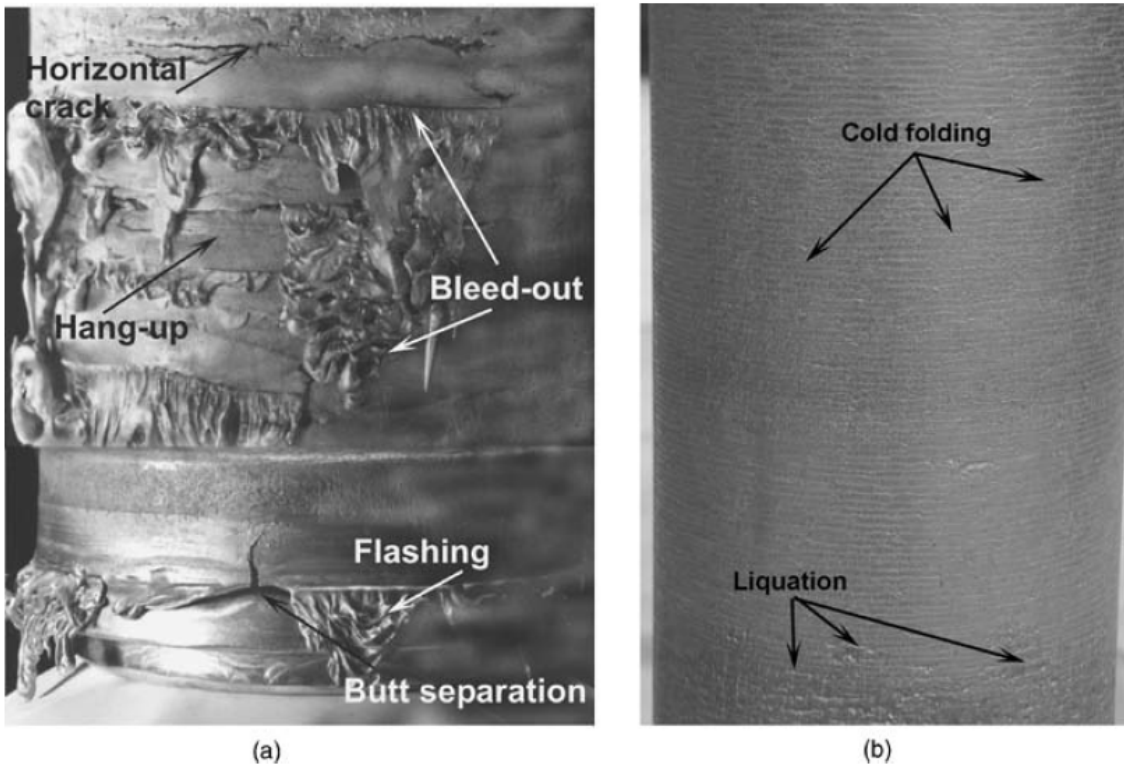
a) Flashing, bleed-out, hang-up, butt separation and cracking b) cold folding and liquation surface defect on a DC-cast aluminium alloy billet [10]
